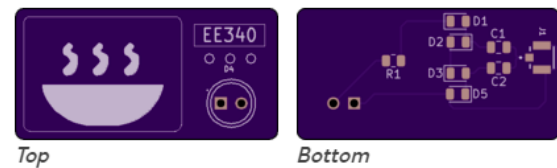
Finalized PCB Layout sent to OSH PARK for fabrication
